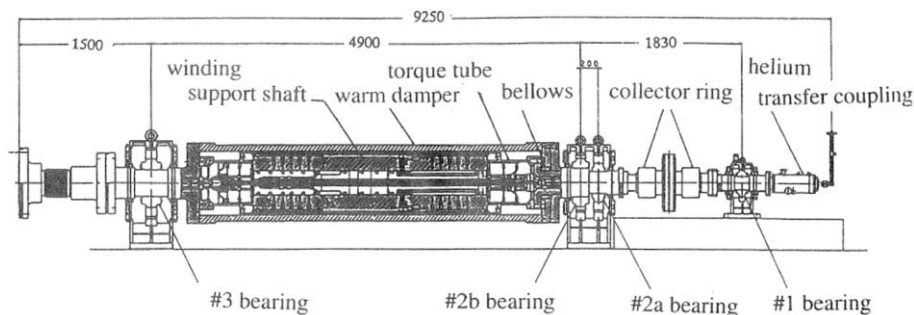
Cross-section of rotor having highly stabilized field winding.
